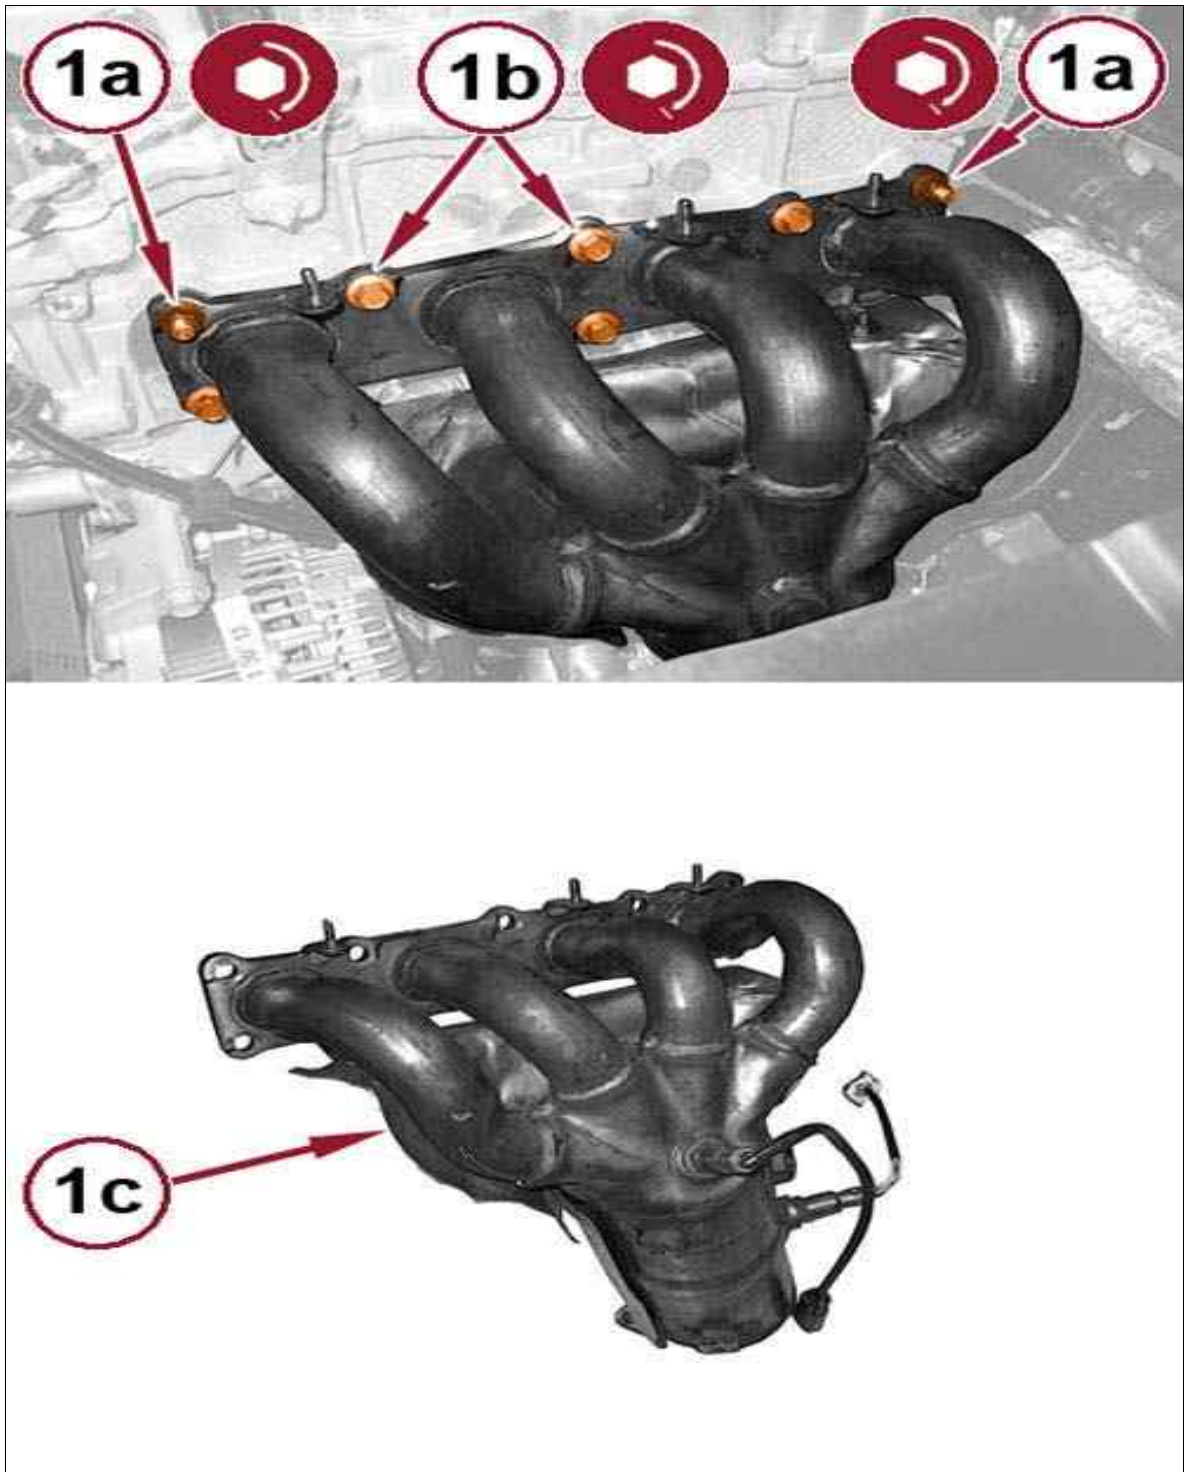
Ensure Arrow On Exhaust Manifold Gasket Is Pointing Downward
